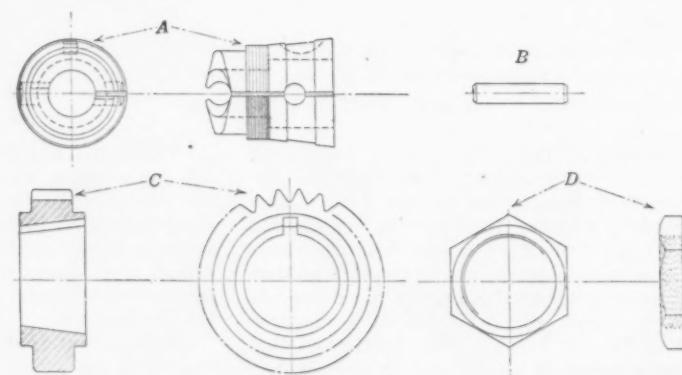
Driving sprocket and taper sleeve upon which it is mounted
